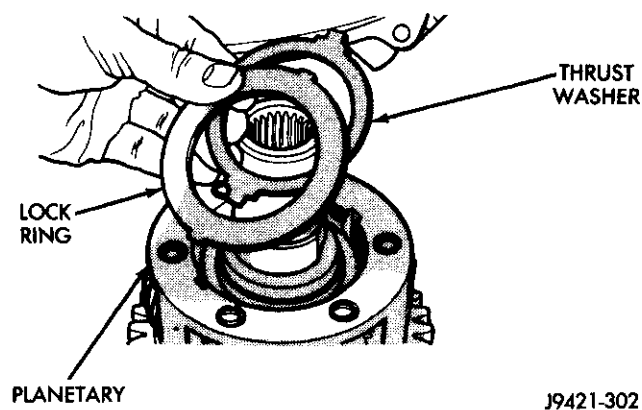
Planetary Lock Ring And Front Thrust Washer Removal
